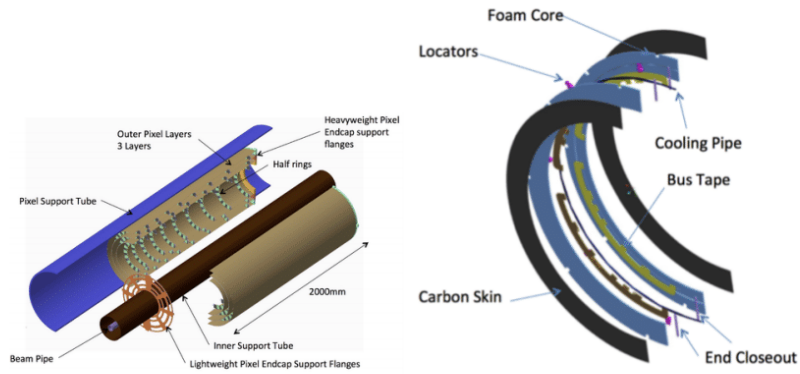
Left: Exploded 3D drawing of one Outer End-cap. Right: Exploded view of the surface of a half-ring
